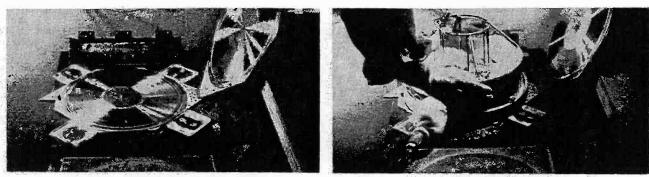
To begin Microfusion process of making a record, lightweight book die is placed in simple jig and opened up.
